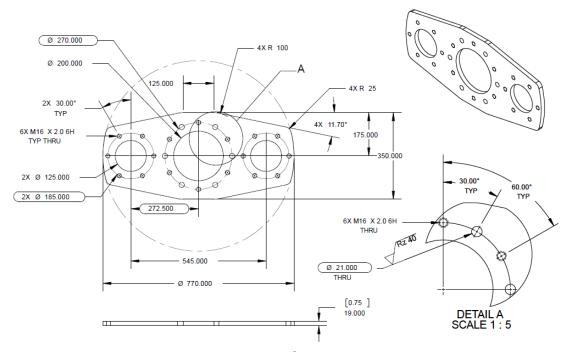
CHROMOPHARE® Shoulder Mounting PLate
